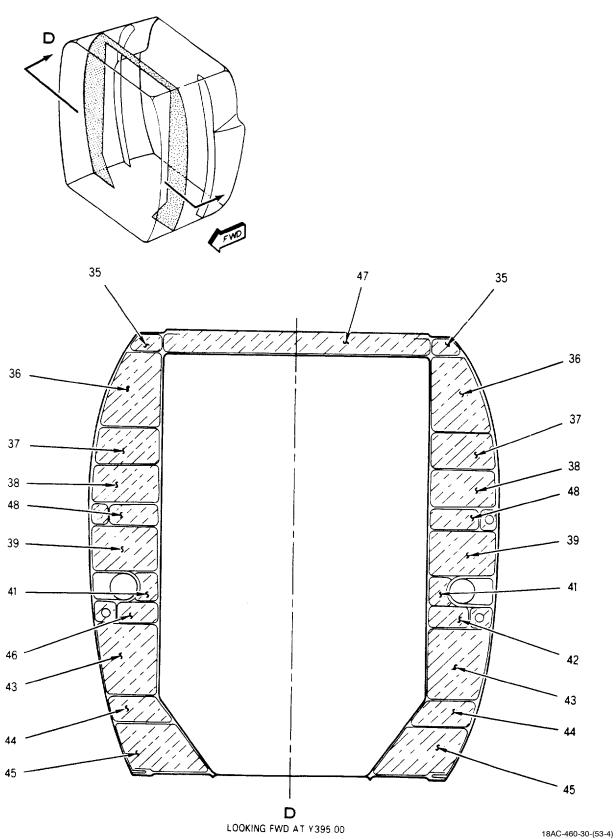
No. 2 Fuel Tank Cavity Foam Filler - 161353 THRU 161741 (Sheet 4)
